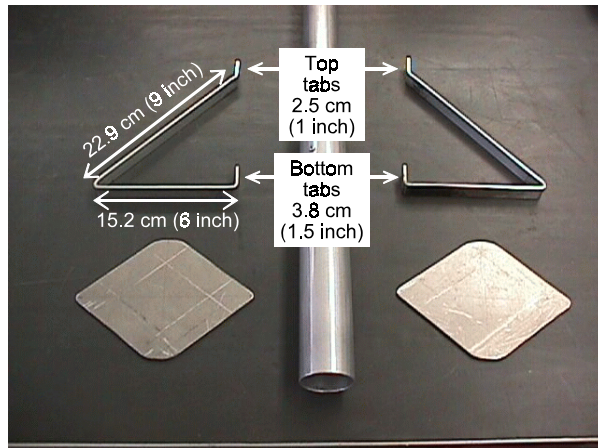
Bent aluminum strap pieces and diamond-shaped pieces of aluminum plate shown with the cut tubing.
